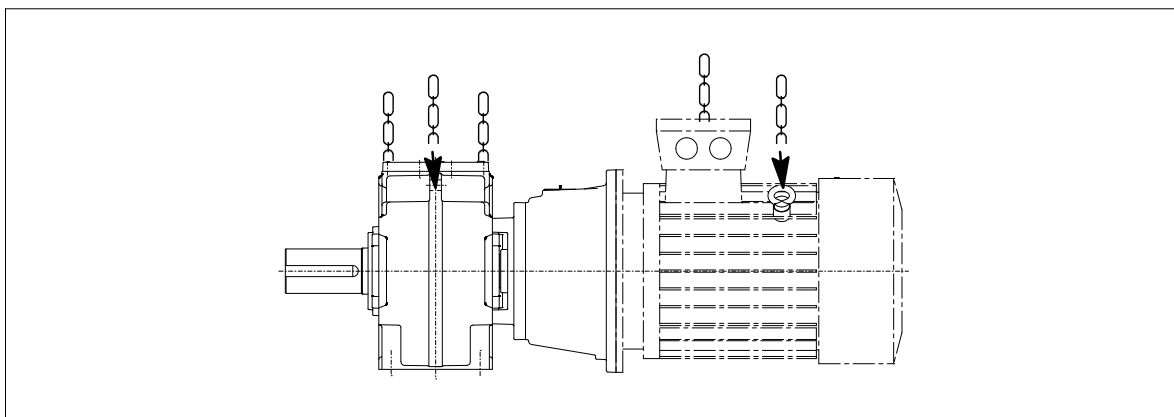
Attachment points on gear units of types H2.. and H3.. up to size 512 with motor and bell housing
